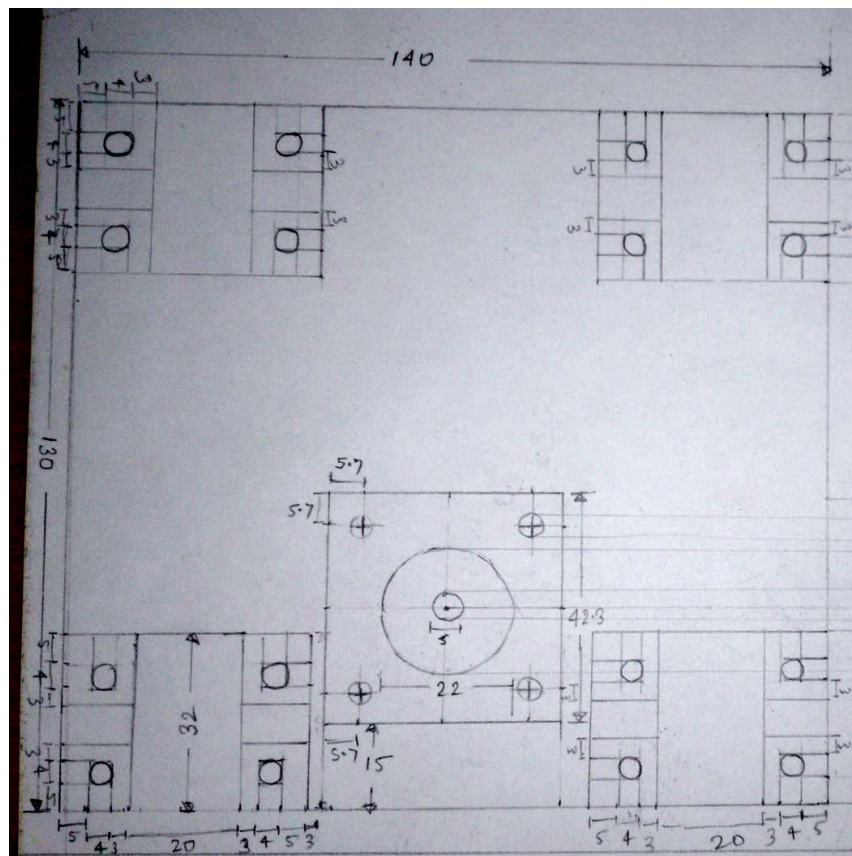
ED diagram (BOTTOM VIEW) of the chassis part containing 4xFig.6 parts coming the plane at the 4 corners, a stepper motor coming out of the plane which is attached at the bottom side in this fig, and a stepper motor going inside the plane placed at the top side in this fig.
